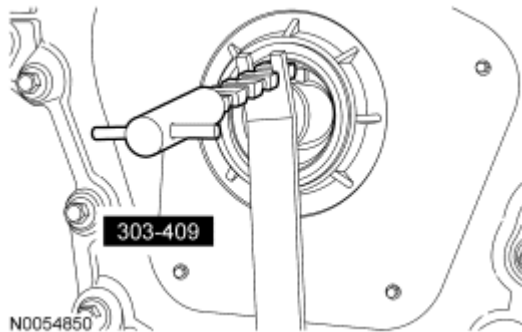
Removing Crankshaft Front Seal Using Special Tool (303-409)
